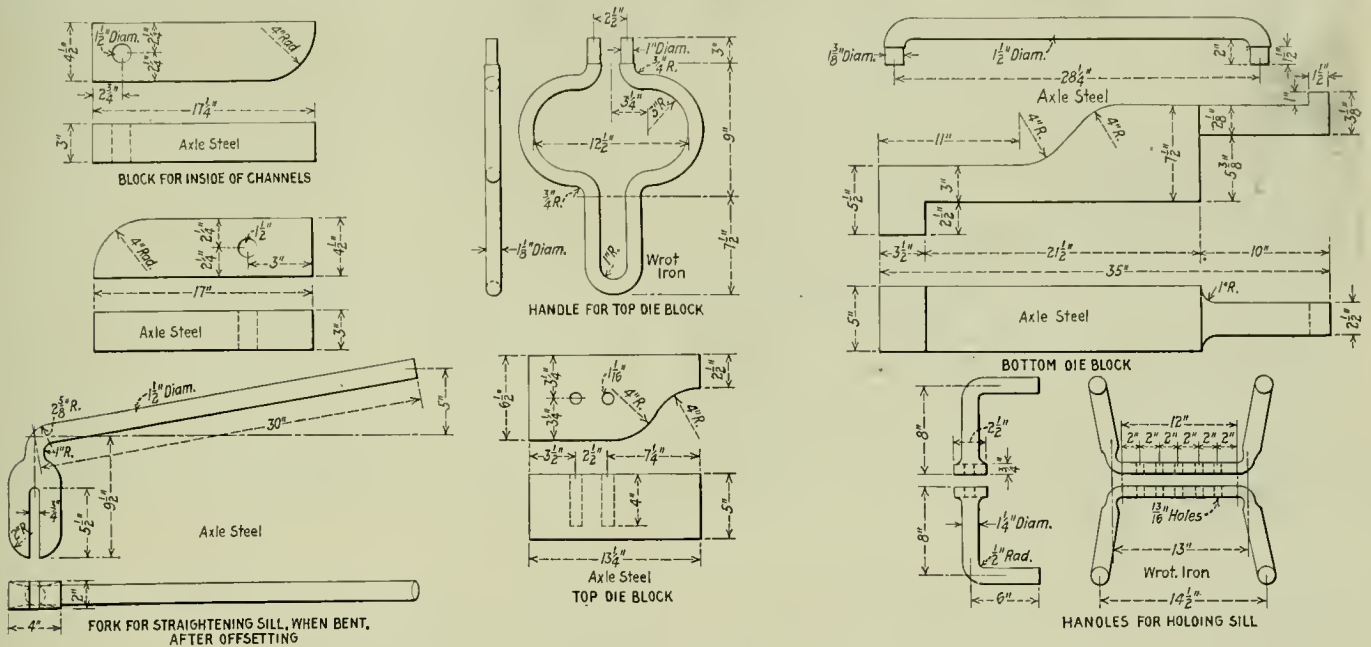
Details of Formers Used for Bending End Sill for Standard Motor Truck
